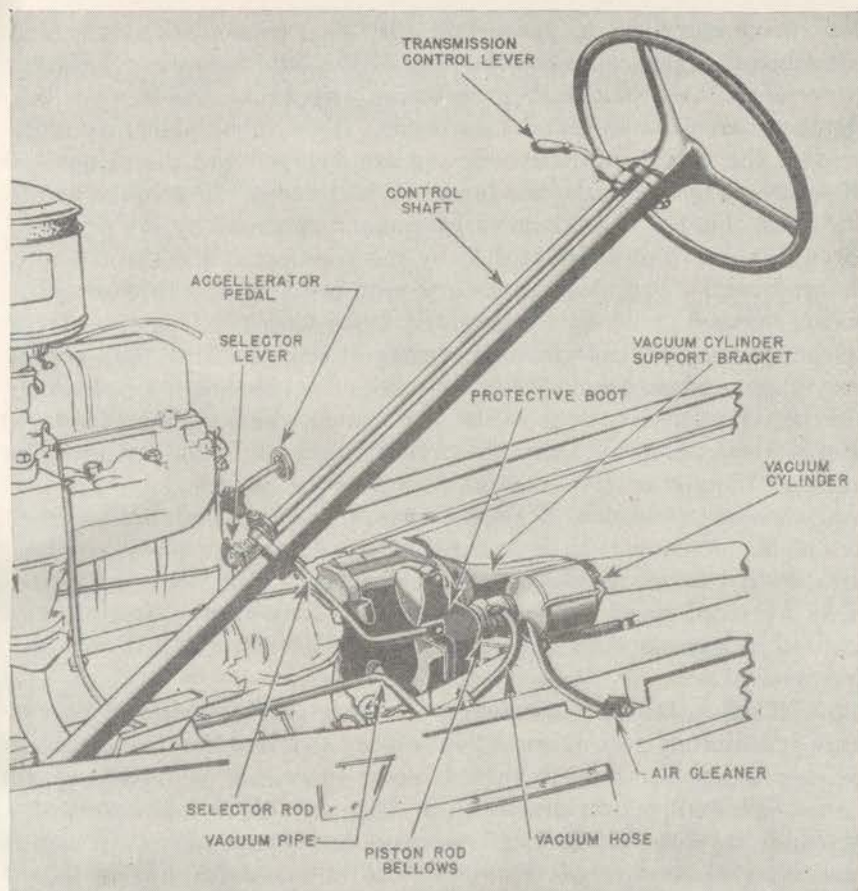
Vacuum-assistor gear shift mechanism.
